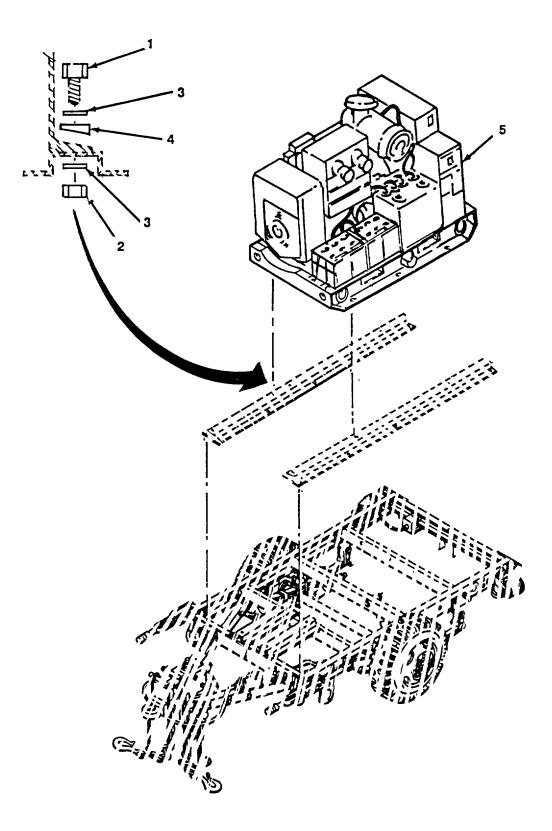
Generator Set and Mounting Rails (Sheet 1 of 2).
